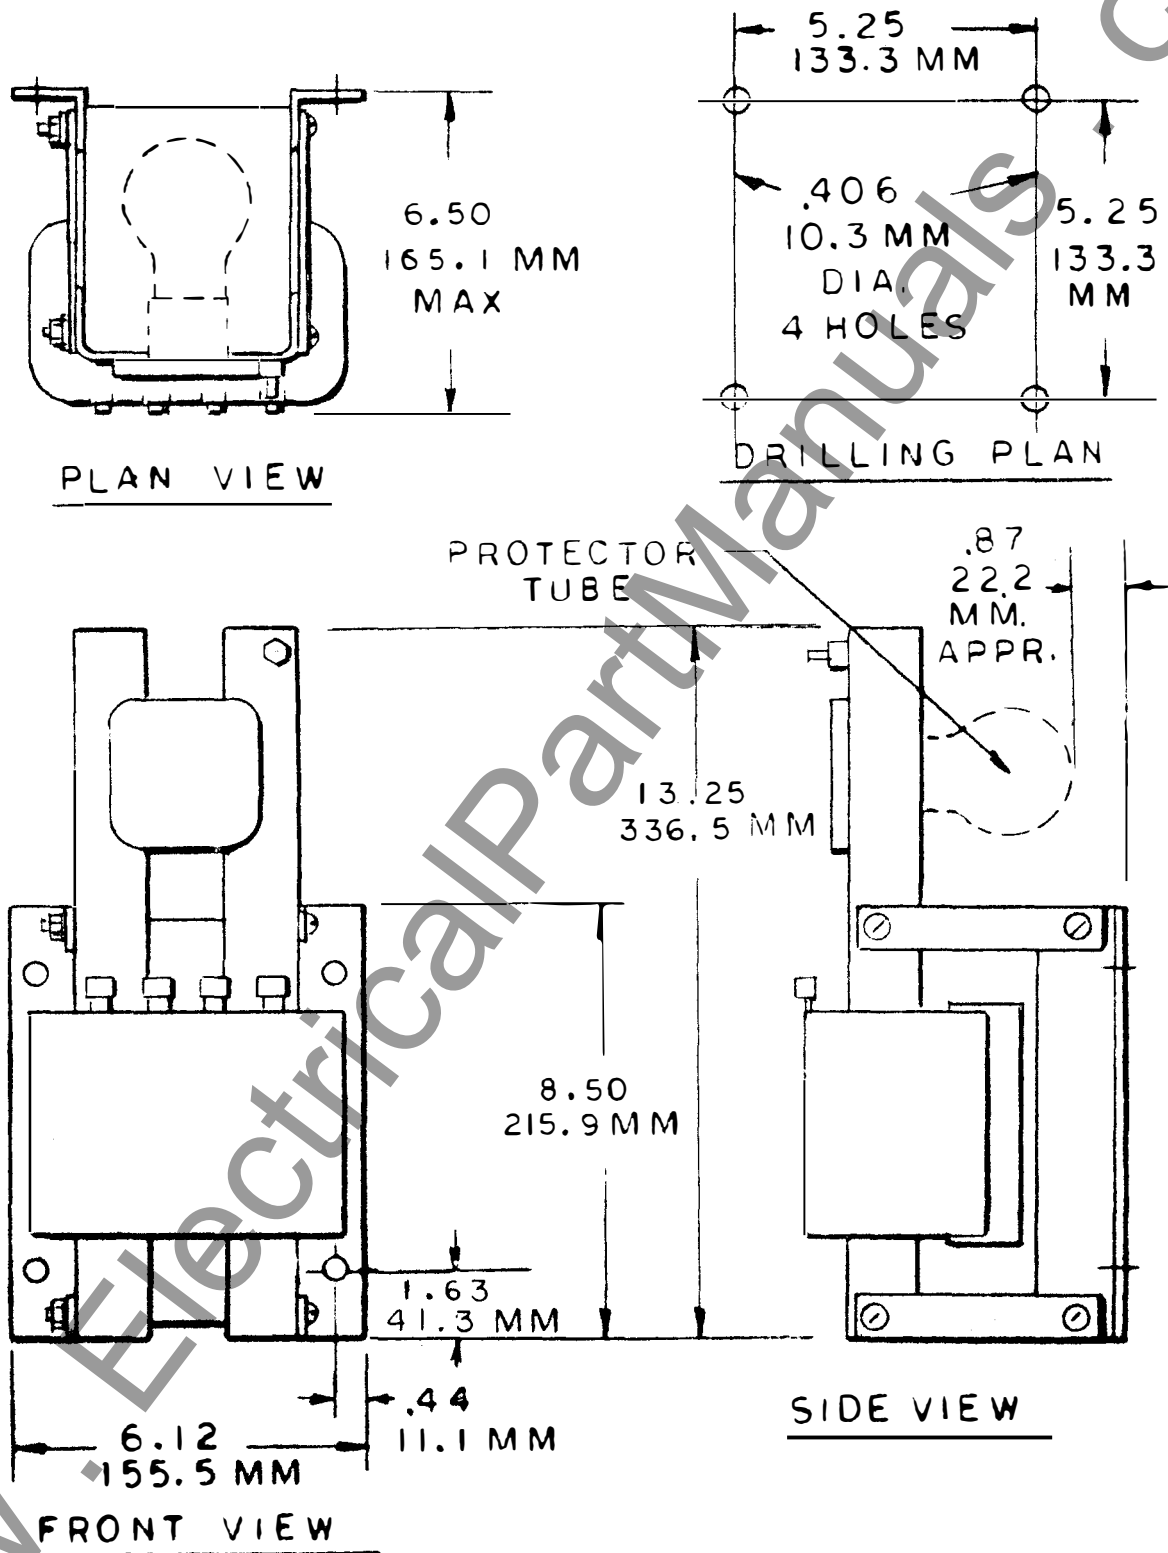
B (0275A2045, Sh. 2) Outline and Mounting Dimensions for 50 Hertz Mutual-Drainage Reactor
